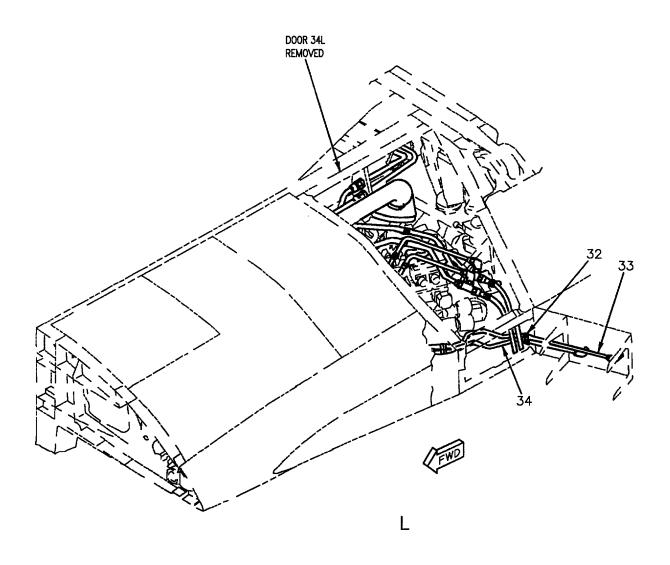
Inner Wing Removal and Installation Attachments (Sheet 6)
